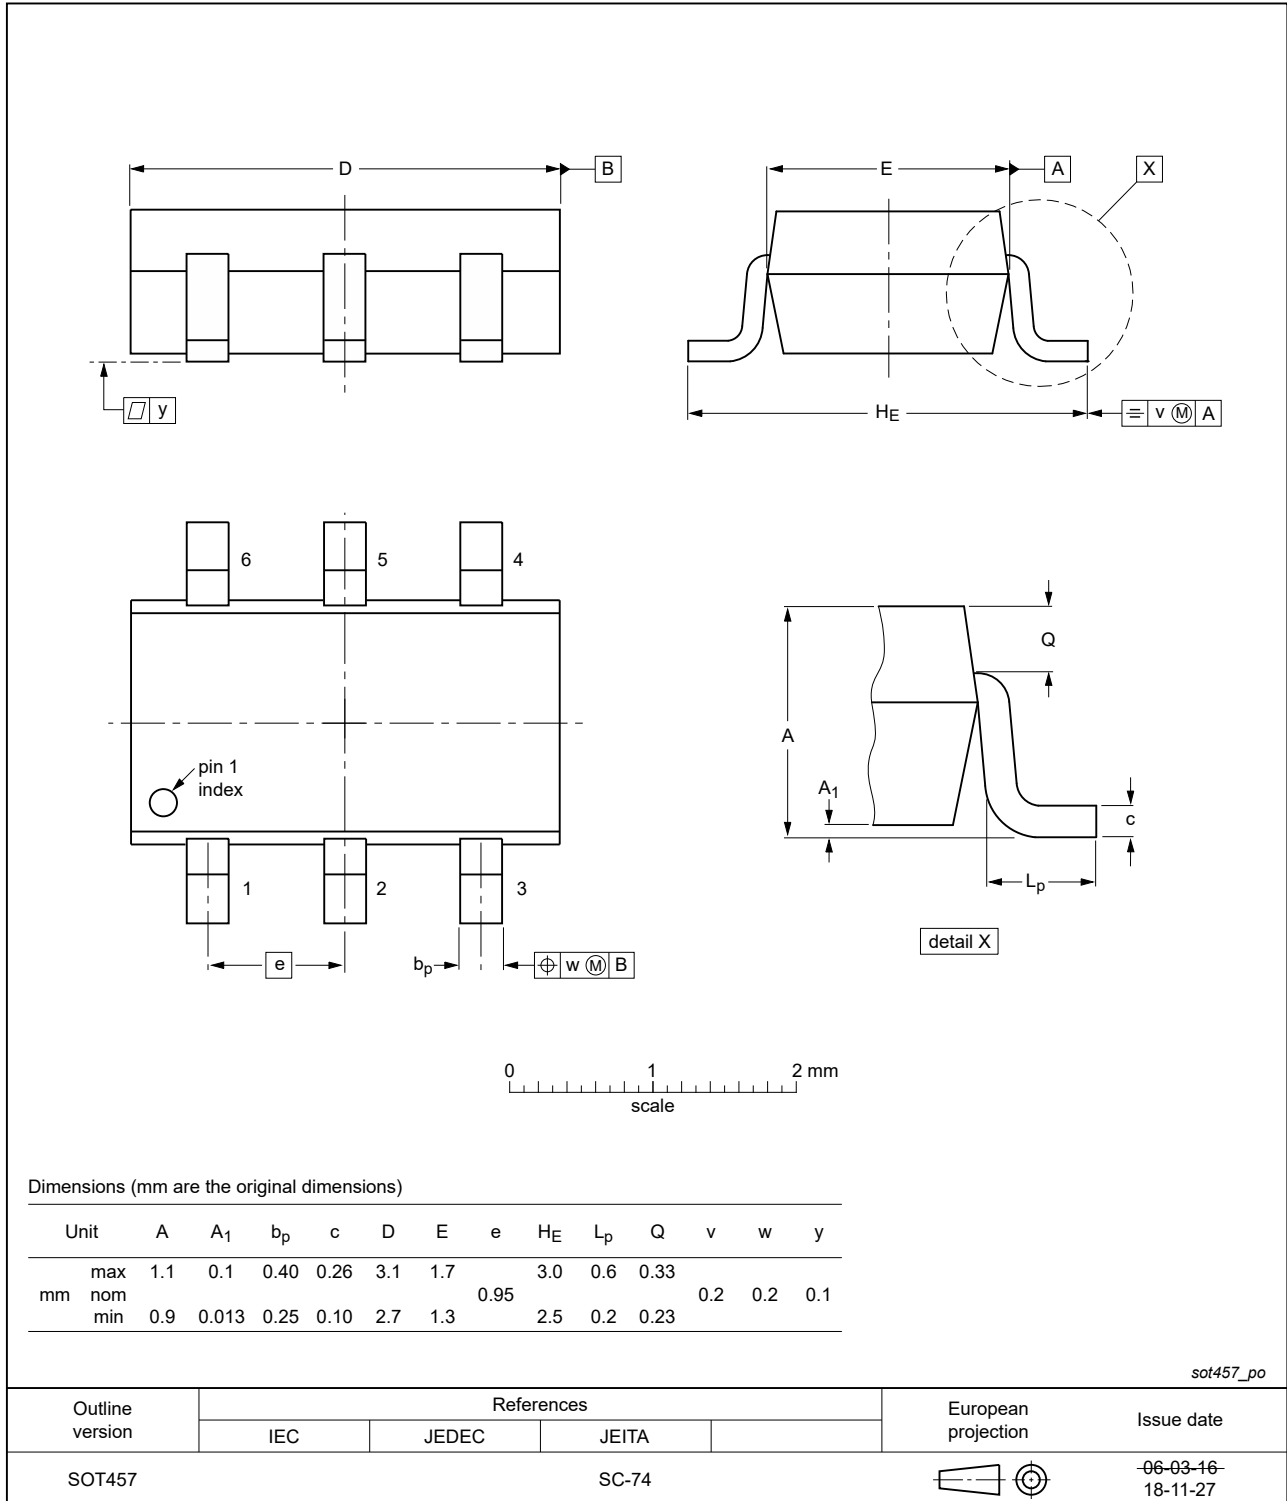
Package outline SOT457 (SC-74; TSOP6)
